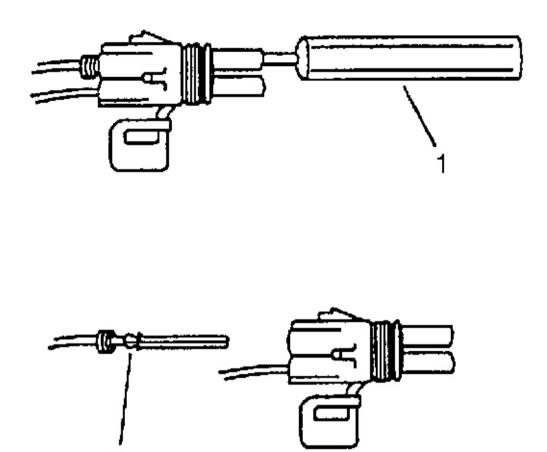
Removing Cable & Terminal From Connector Courtesy of GENERAL MOTORS CORP.
